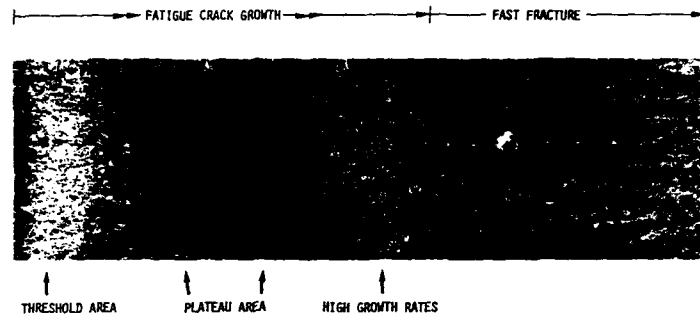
Optical macrograph of the fracture surface of a fatigued and fractured 8090-T651 CT specimen in L-T orientation tested at $R = 0.1$ in laboratory air (DFVLR).
